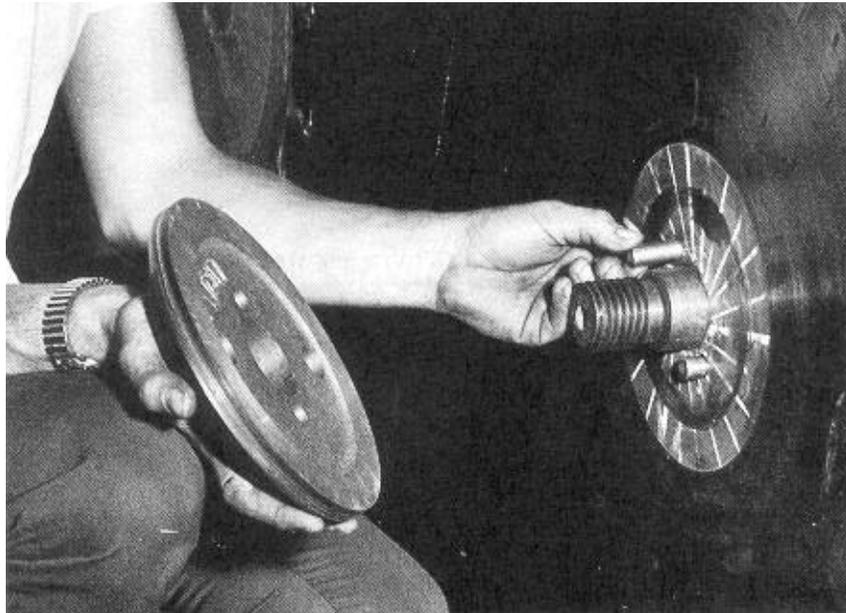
Inspect lug pins for damage before replacing the collar and tightening the arbor nut.
